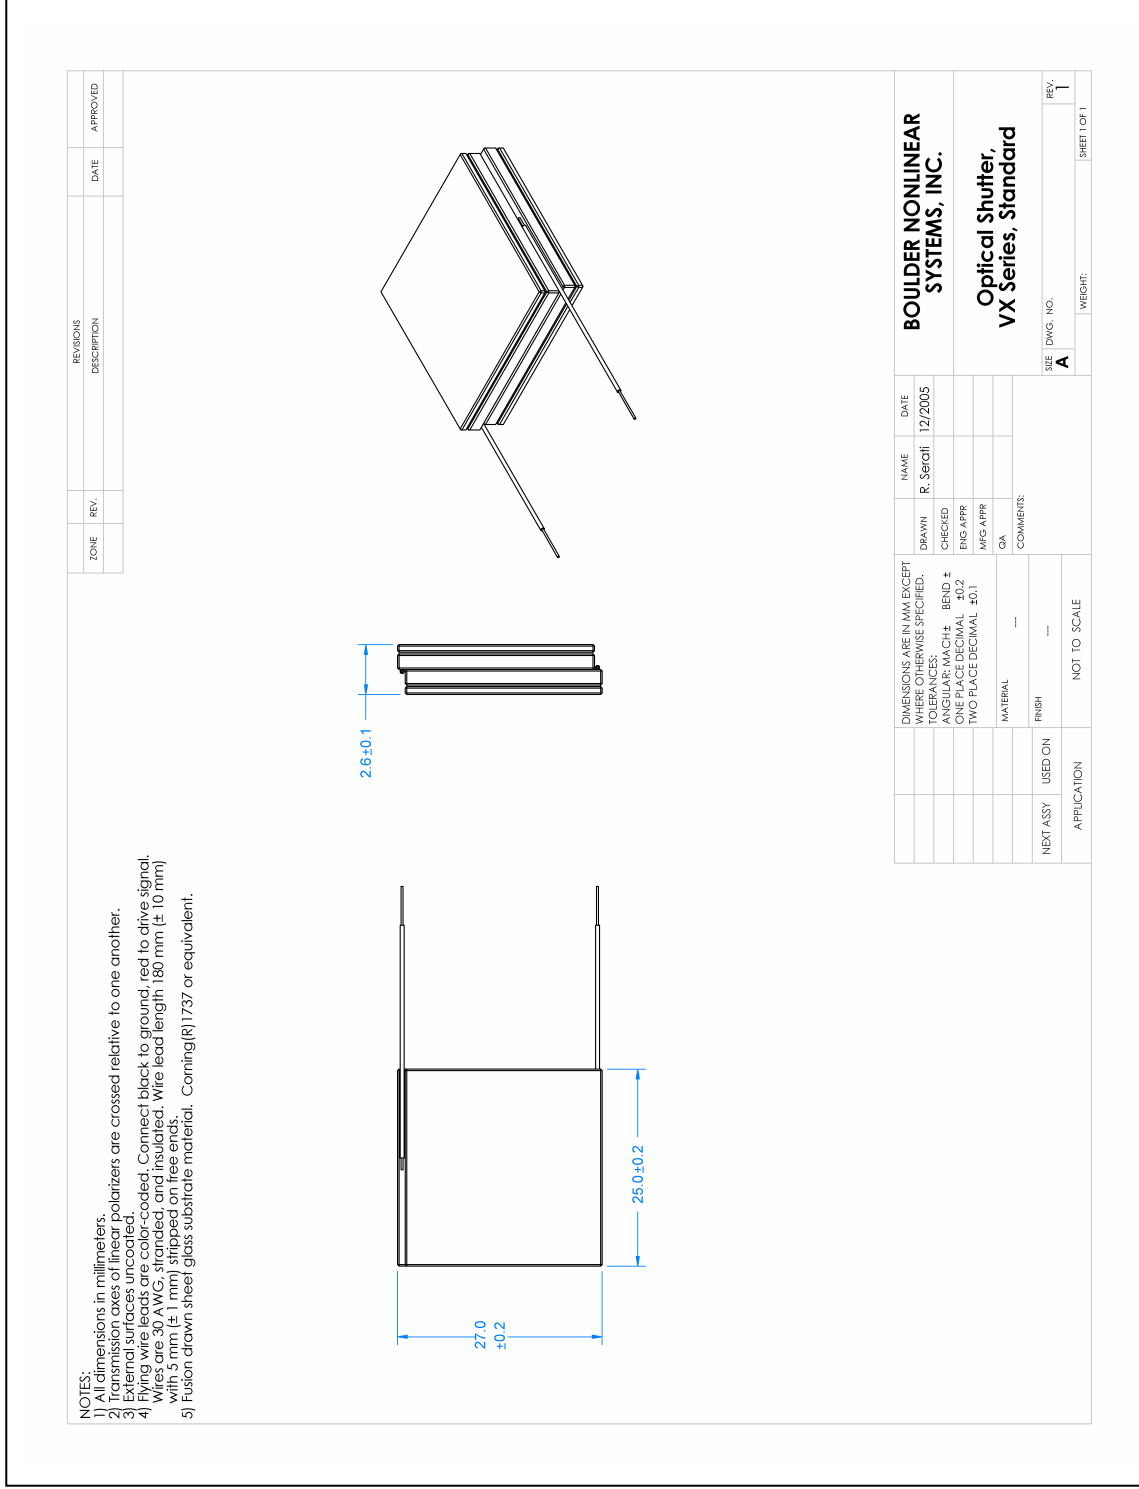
~ Top level assembly drawing for standard VX Series Optical Shutters.
